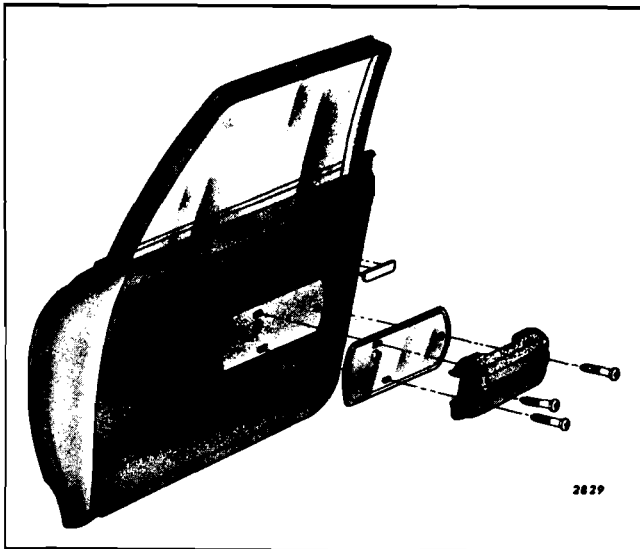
Applied Type Door Arm Rest - "A" Styles Shown
